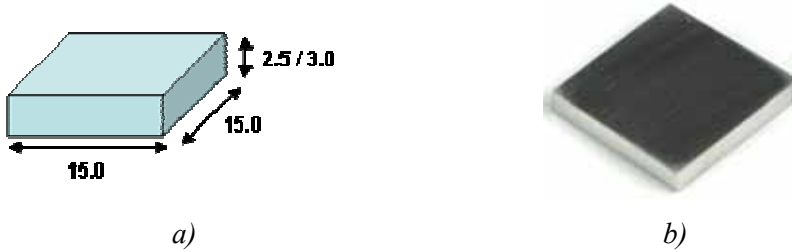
Test coupon: a) nominal dimensions; b) coupon before testing.
